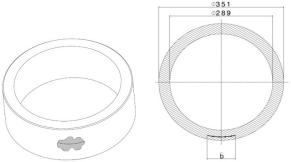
(left) Shape of expected delamination – Isometric view; (right) Cut through component showing defect length
